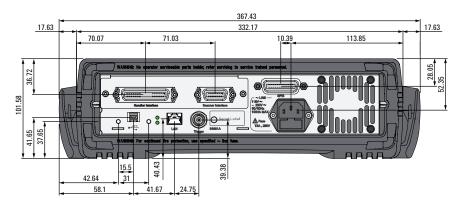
Dimensions (rear view, with handle and bumper, in millimeters, nominal)
